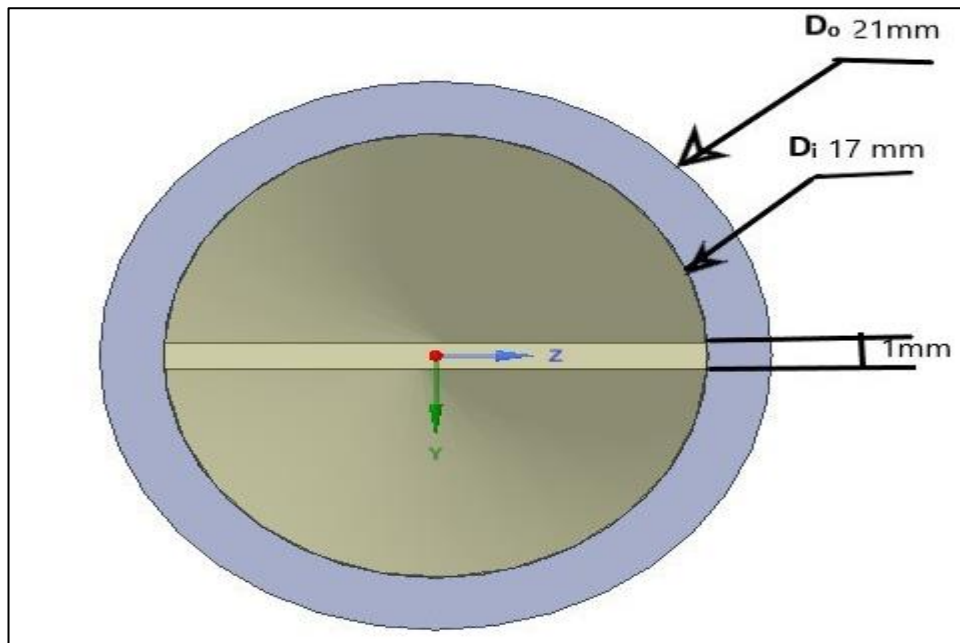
Dimensions of the twisted tape inserted tube from the cross-section view.
